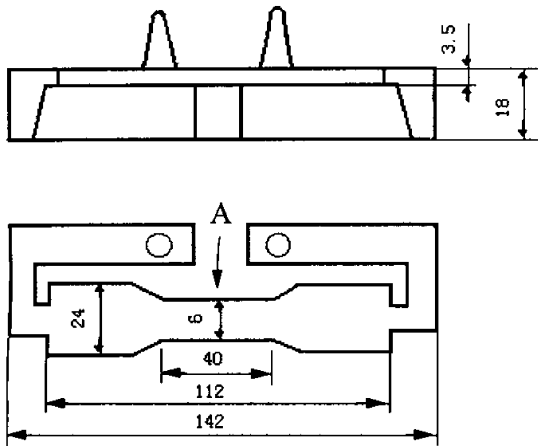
The sketch of mechanical test specimen dimensions according to ASTM638 M standard.
